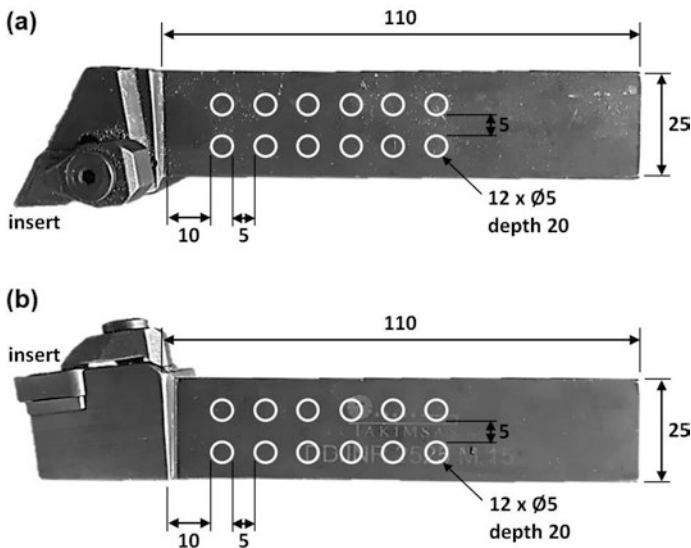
STF holes on the (a) top and (b) flank surface of the shank [37]. Reprinted by permission from Elsevier
